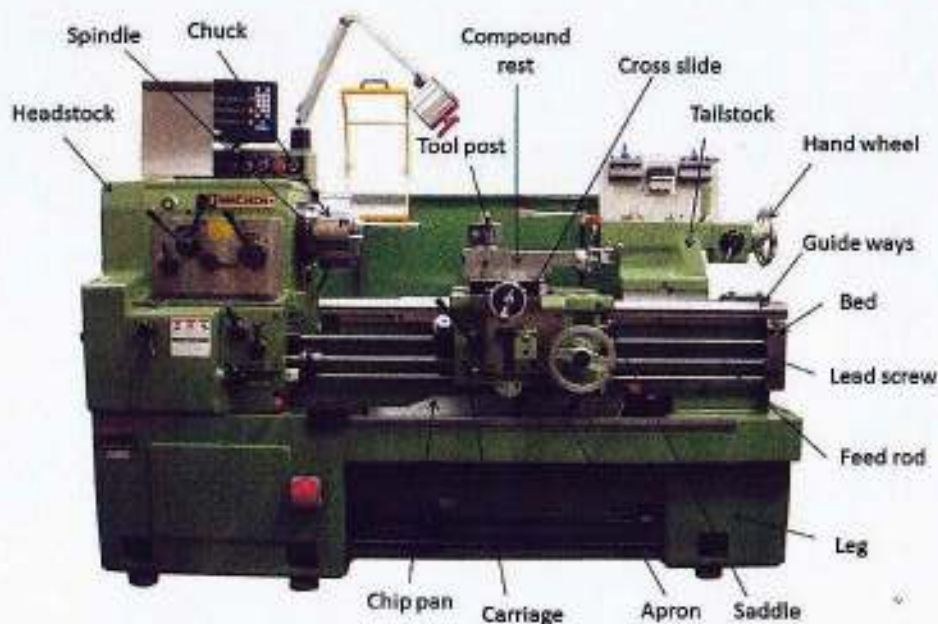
Lathe machine (Image Courtesy: mech4study.com)
